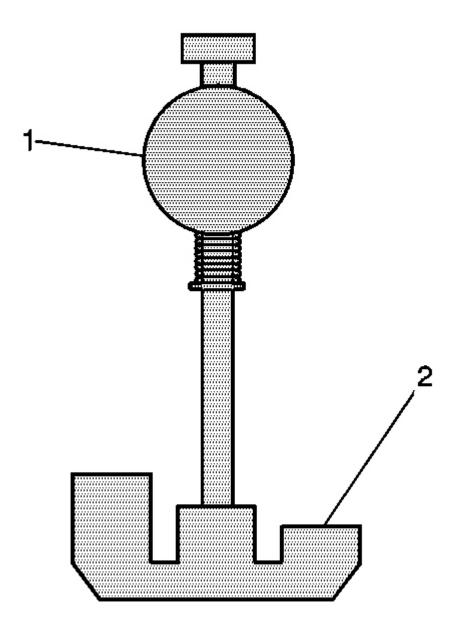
J 21777-1 & J 44416-3 Courtesy of GENERAL MOTORS CORP.
